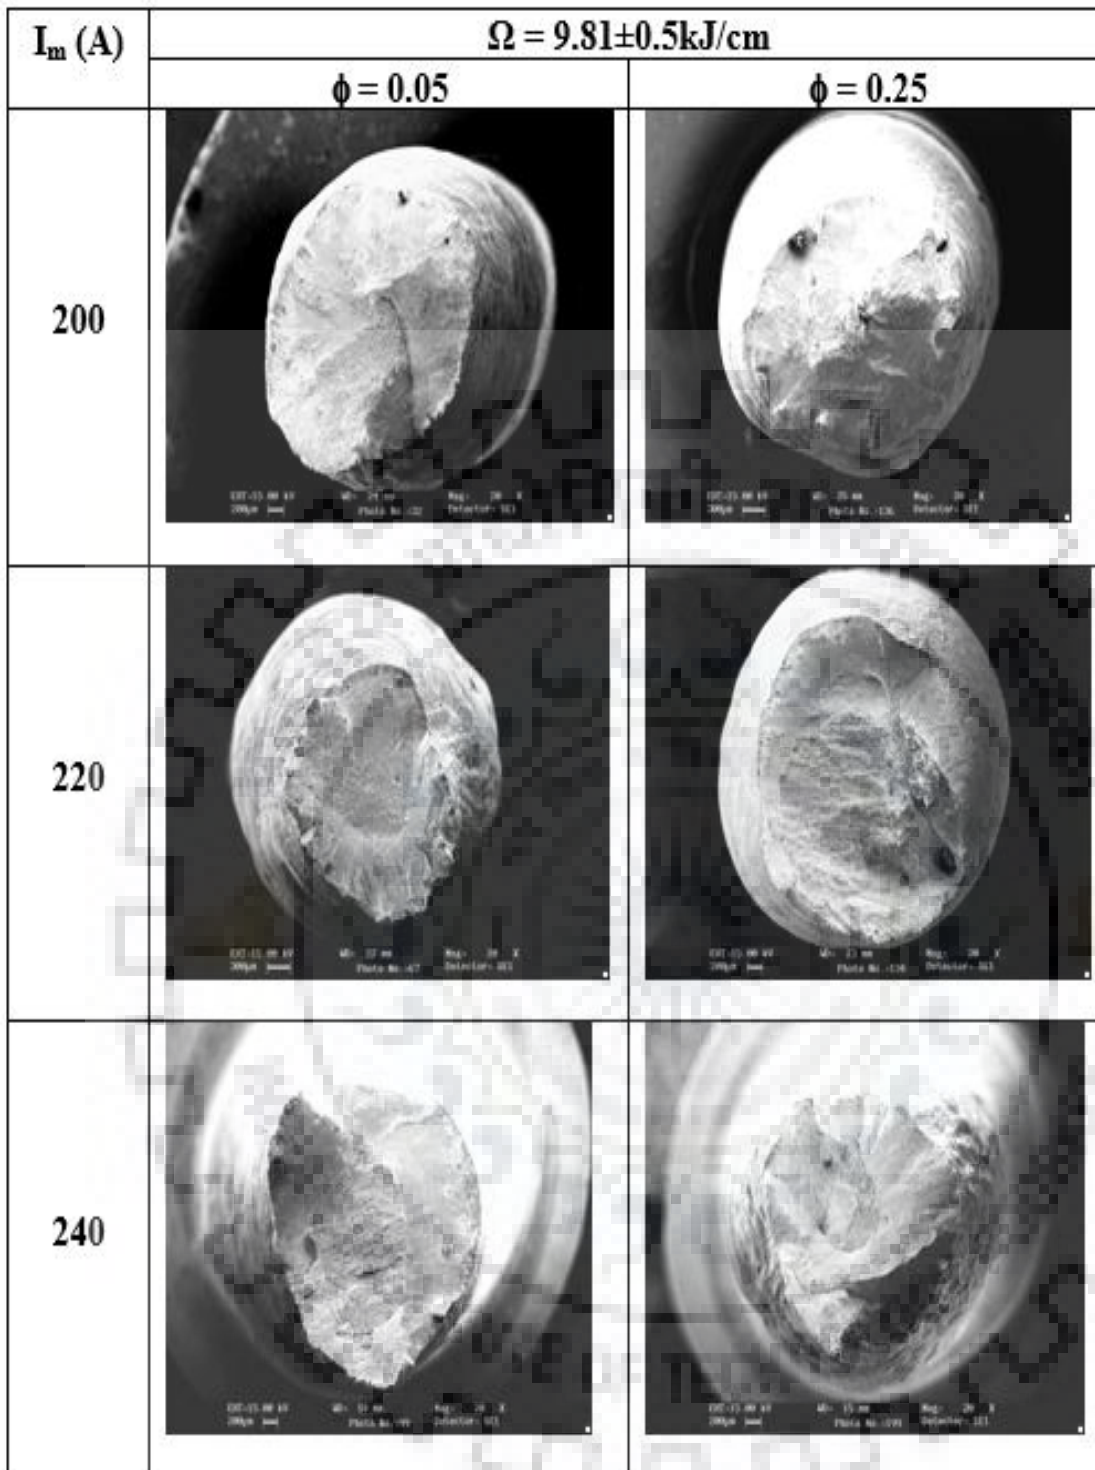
Typical fractured specimen of all weld tensile specimen of MPMSPL conventional groove weld joint and MPSSPL ultra-narrow gap P-GMA weld joint prepared at a given Ω of $9.81 \pm 0.5 \text{kJ/cm}$
